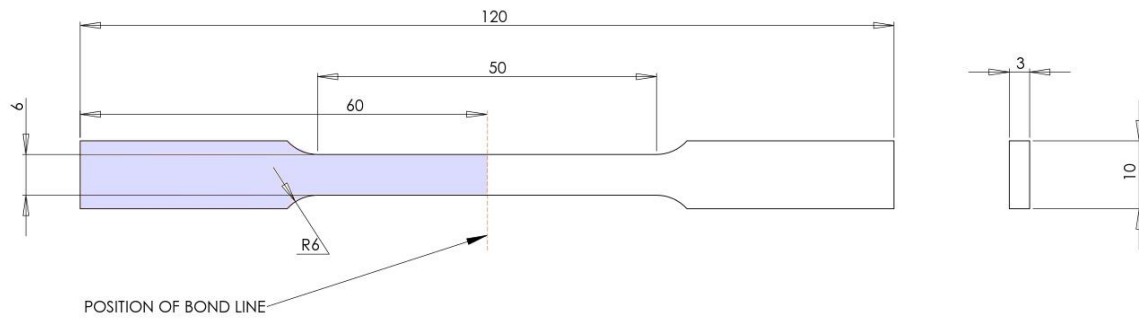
Technical drawing of the ASTM E8/E8M tensile specimen dimensions.
